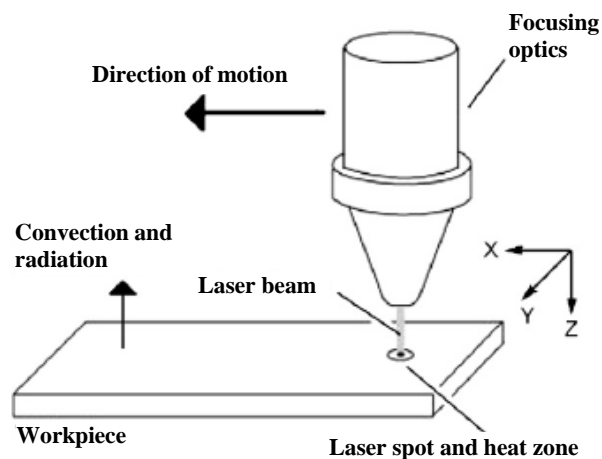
Basic setup of laser hardening of a flat plate workpiece.²⁴
